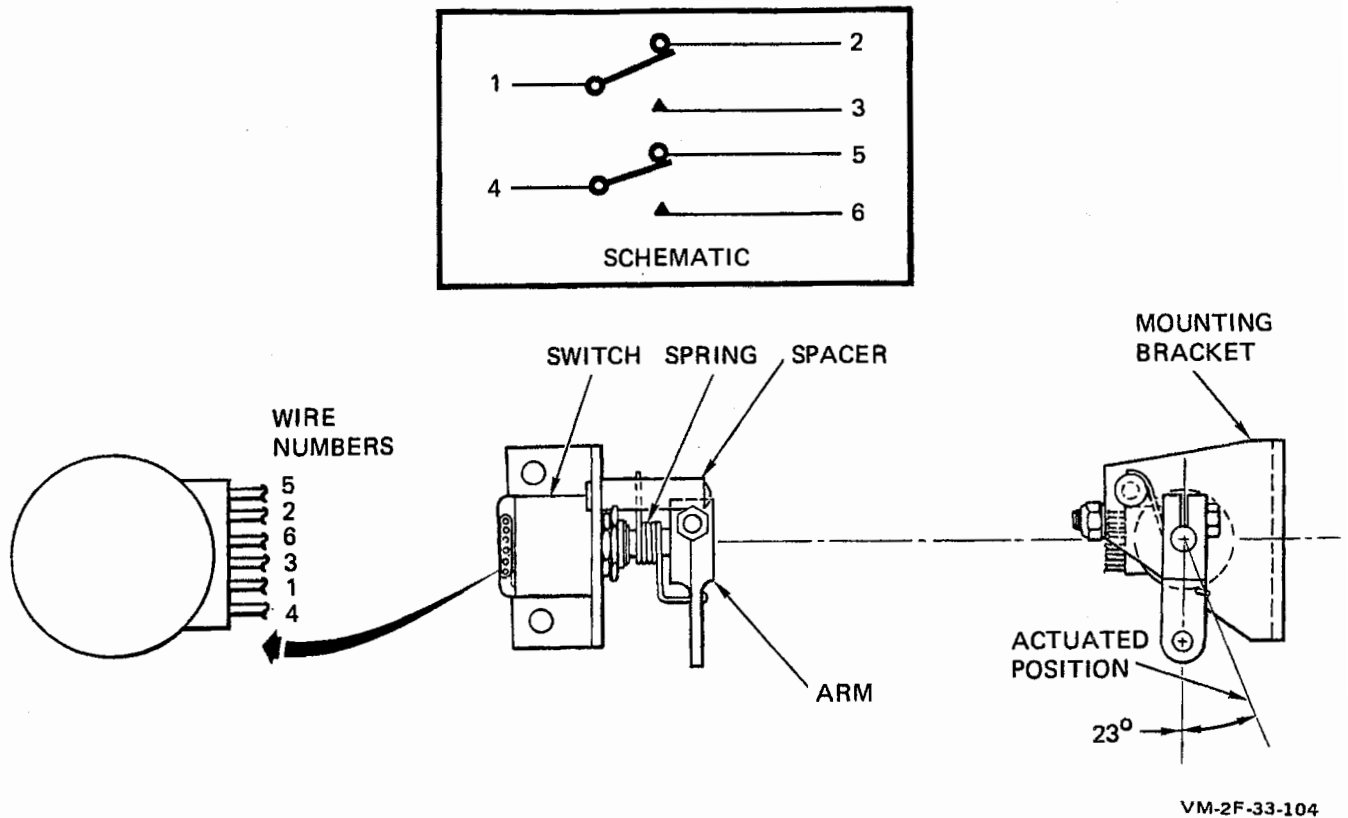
Main Landing Gear Uplock Switch Assembly Checkout
